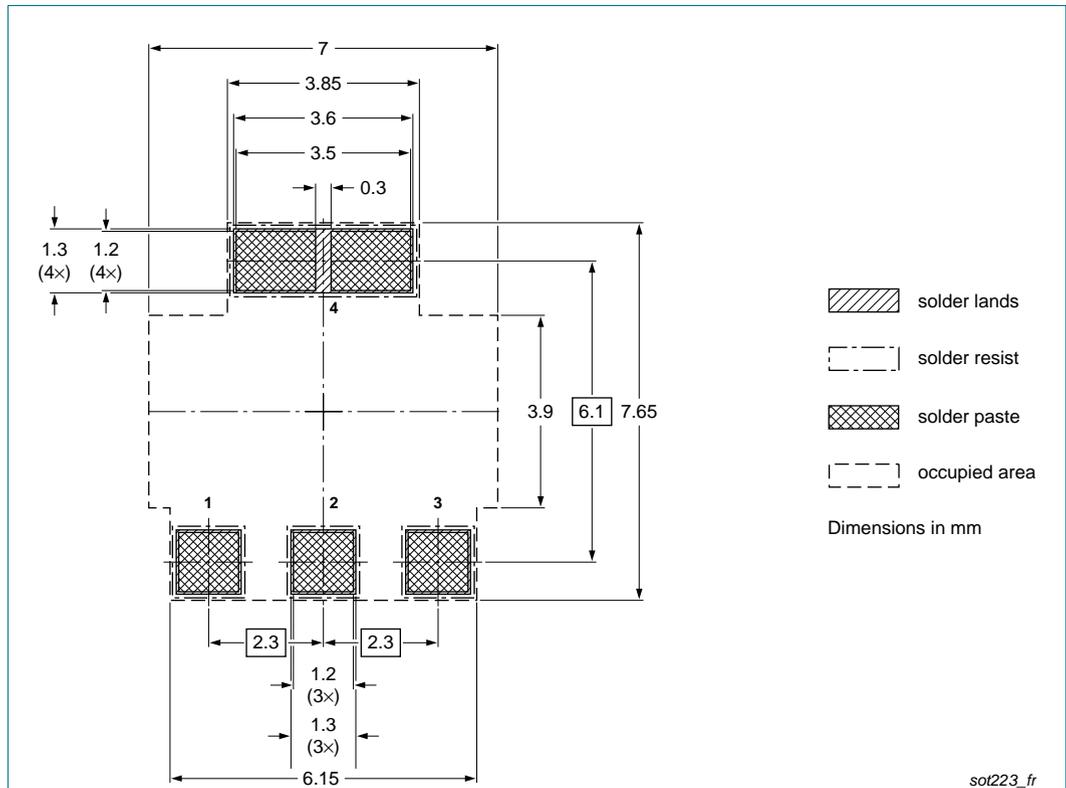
Reflow soldering footprint SOT223 (SC-73)
